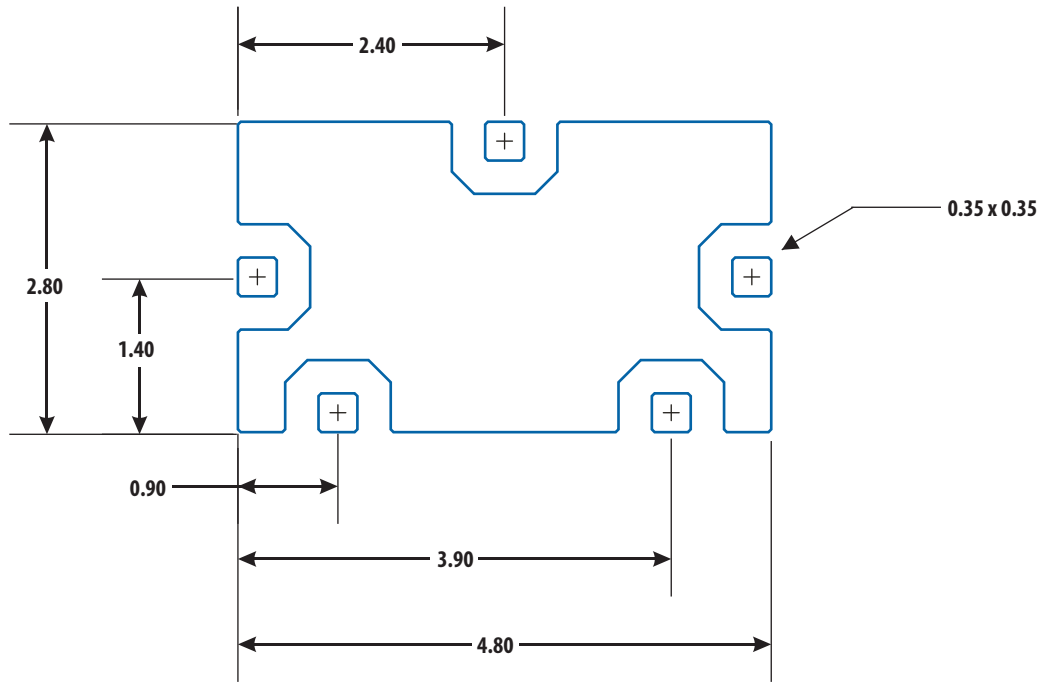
ACFM-7109 Footprint, Dimensions in mm (top view).
